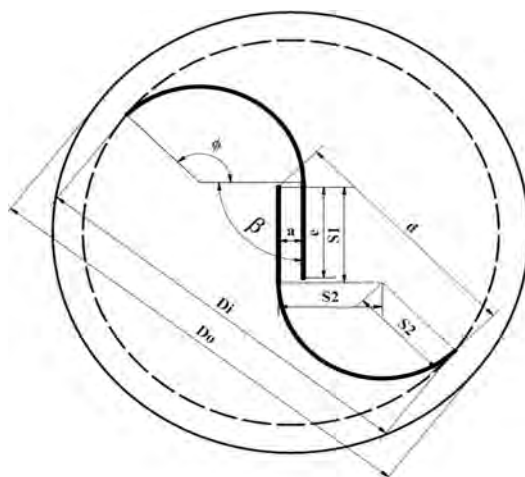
Dimension parameters of the Bach-type savonius wind turbine.
